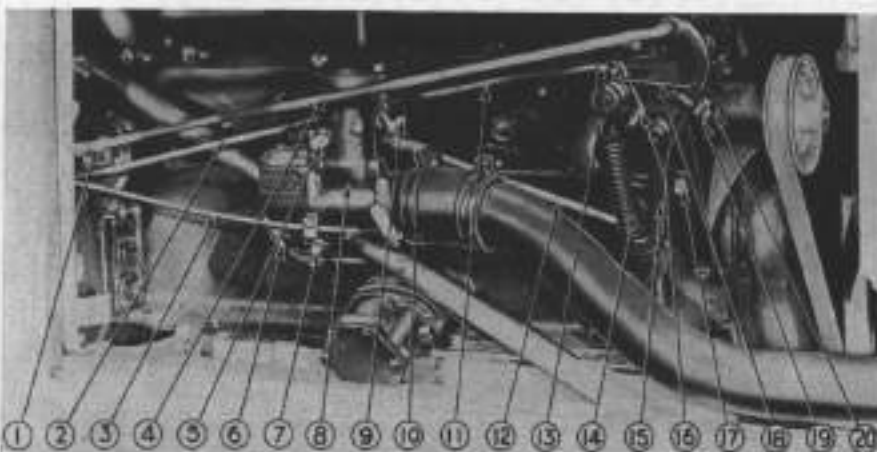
Models 101 and 101 Super carburetor and governor controls. Governor is belt driven.
